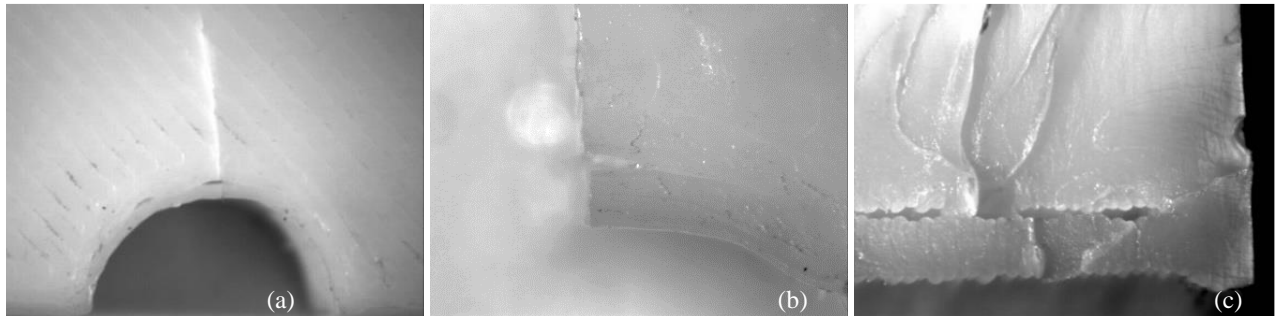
Observed problems: (a) inaccuracy on filament placement, 6 \times ; (b) Detail of the fracture surface, 25 \times , (c) fracture surface, 25 \times .
